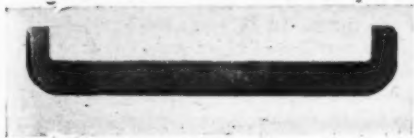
Section of liner in main bearing of Mercedes-Benz D.B. 601N.
